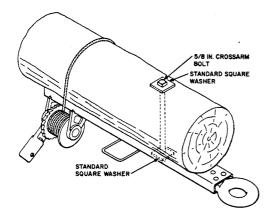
Method of Attaching AT-8137 Drawbar to Pole
